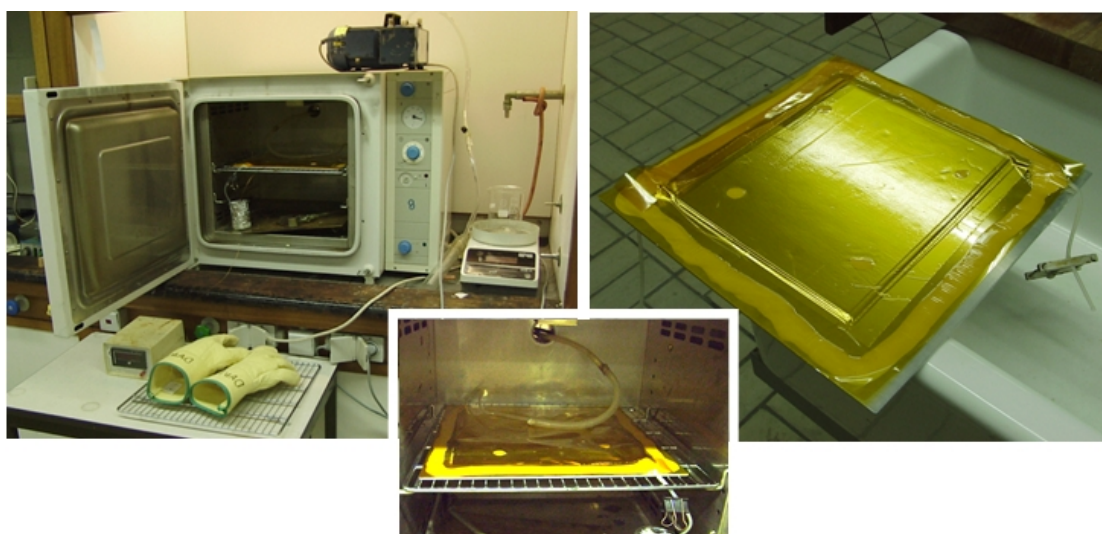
Left and center: proto-type equipment, right: bagged fibers.
